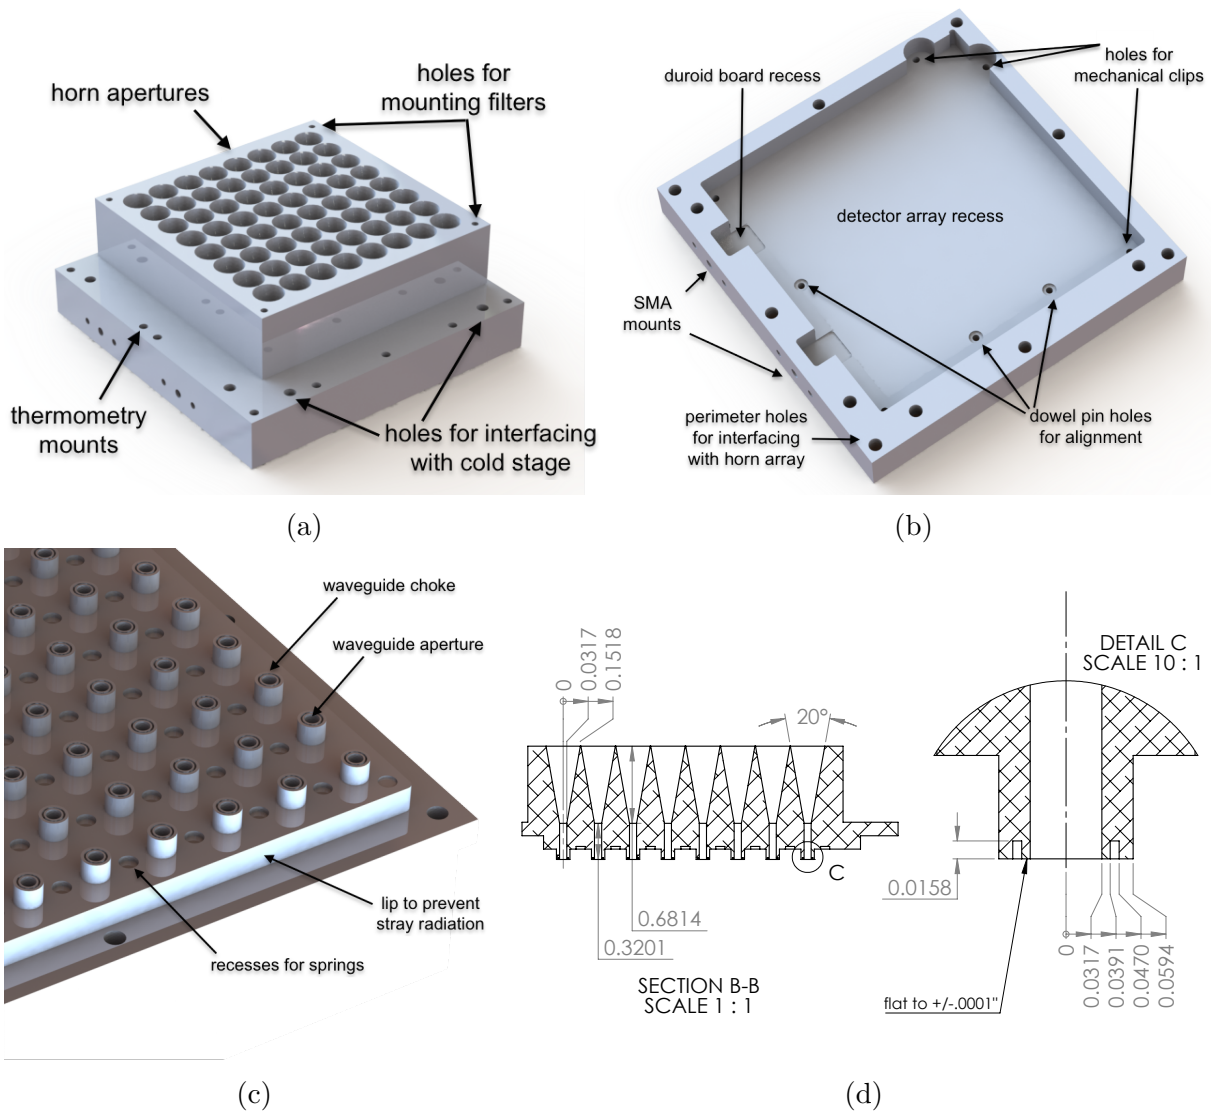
a. CAD model of a detector module. The module has two main parts: the top, which is the horn array, and the bottom, which hosts the detector array. Beyond the optical coupling scheme, there are a number of design considerations that must be taken into account. Visible in this rendering are the holes for mounting the filters, which define the bandpass. Also visible are the holes for mounting the low-temperature thermometers to monitor the module temperature. There are additional holes for interfacing to the cryostat cold stage. b. Model of the bottom of the module. The main recess is for the detector array, and must be milled smooth to a tolerance of a few microns. There are mounts for the SMA connectors, as well as for the clips, which hold the detector array against the dowel pins. The dowel pins are the mechanical reference for the detector array and for the horn array to the module bottom. The thermal contraction of them materials must be taken into account; the module is designed so that when cold, the detectors and horns align. c. Model of the underside of the horn array. d. Example of a drawing specifying tolerances for machining the detector module. The effect of these tolerances can be simulated using HFSS.
